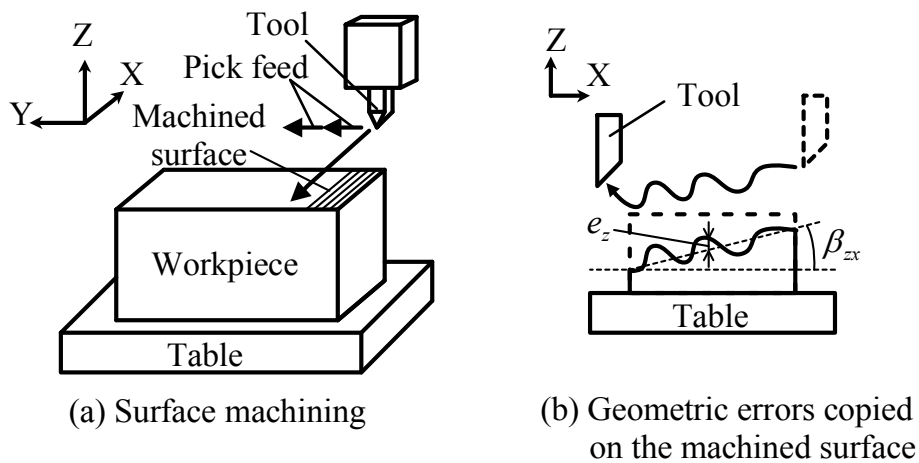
Surface machining with a non-rotational cutting tool.
